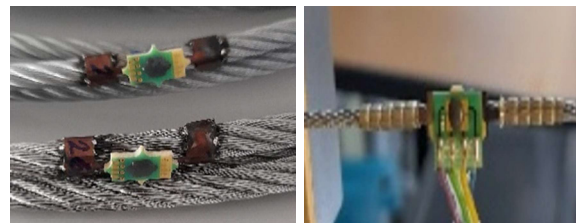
Coupling to tension members with laser welding (left) and crimping (right)
